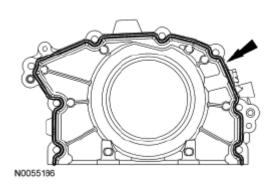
Identifying RTV Silicone Applying Area Courtesy of FORD MOTOR CO.
